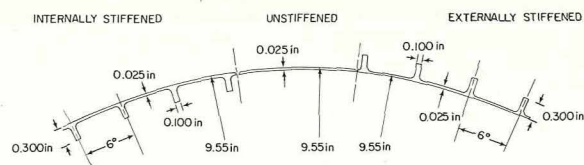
Structural details of stringer-stiffened shells. (After ref. 3.13)
